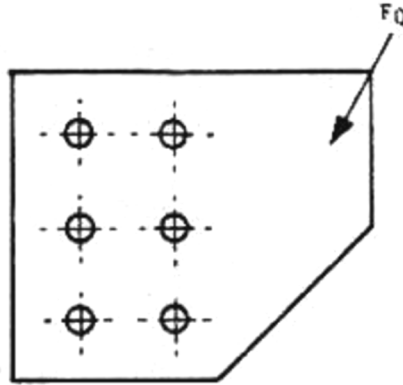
A Typical Eccentric Loaded Shear Joint
